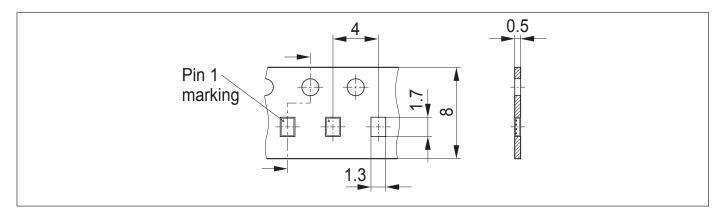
TSLP-10-3 Carrier Tape (all dimensions are in units of mm)
